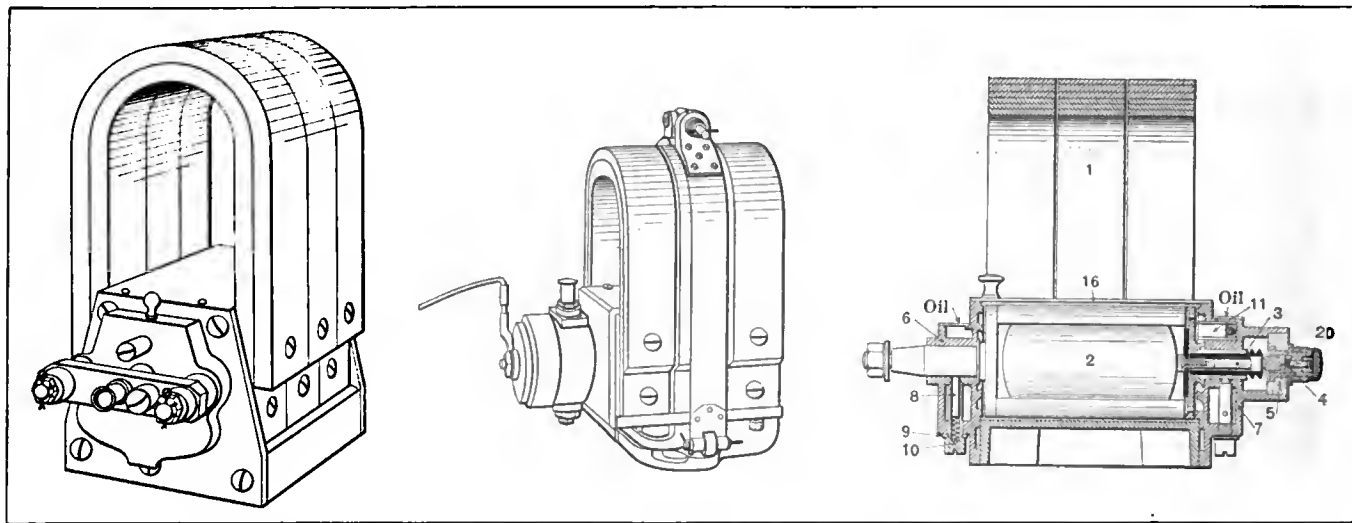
Outside view of the Simms low-tension magneto. Fig. 2—Locomobile magneto with armature taken off, showing details of construction. Fig. 3—Section of the Bosch low-tension magneto and parts of same
